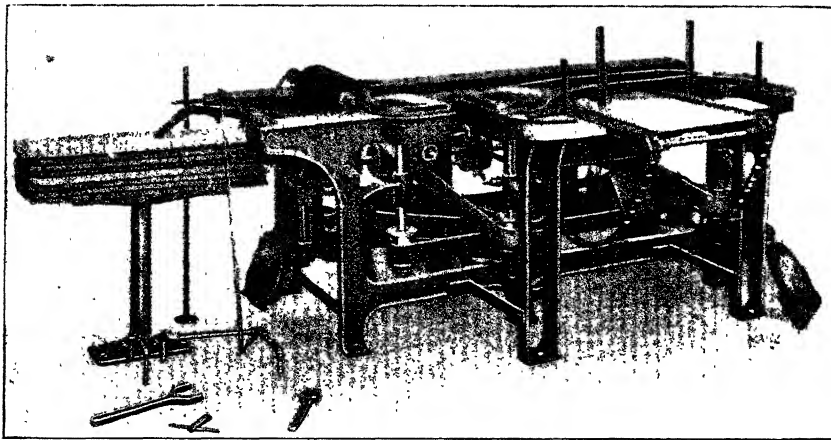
FRENCH AUTOMATIC CAKE TRIMMER.
